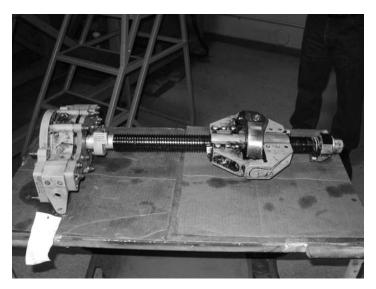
An Exemplar Jackscrew Assembly. The 23-inch-long steel screw is threaded through the aluminum bronze Acme nut (middle), which attaches to the airplane tail structure. The screw is driven by the gearbox (shown on the left), which is attached to the horizontal stabilizer. On the right end is the stop nut.
